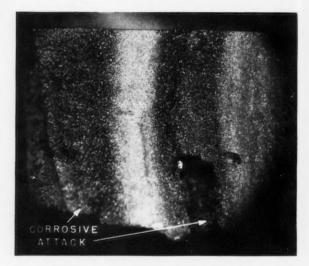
Photomacrograph of section of impeller binding ring. Original magnification, 5.5X; actual magnification after reduction for engraving purposes, 4.5X.
